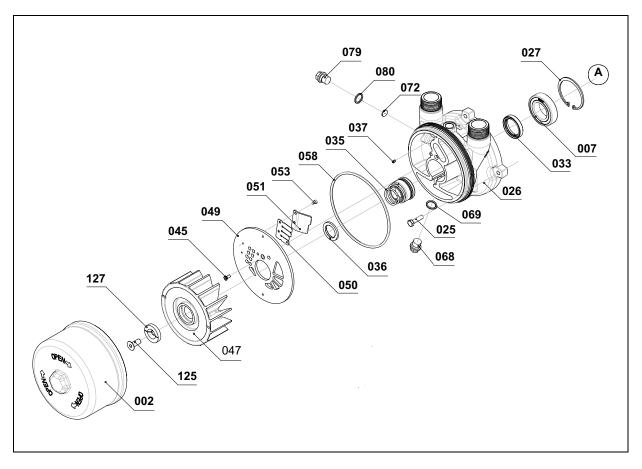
Exploded view: vacuum pump/compressor section (Example, delivered version may differ in some details)
